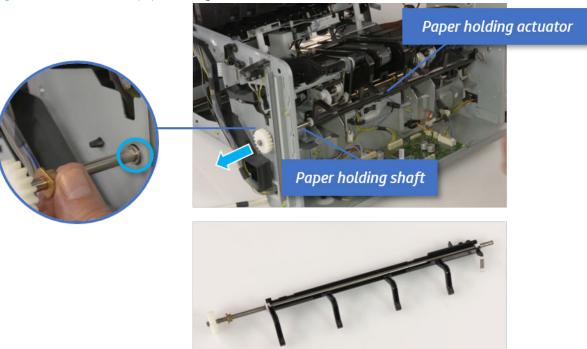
Remove e-ring, rack pinion gear, pin, and bushing
